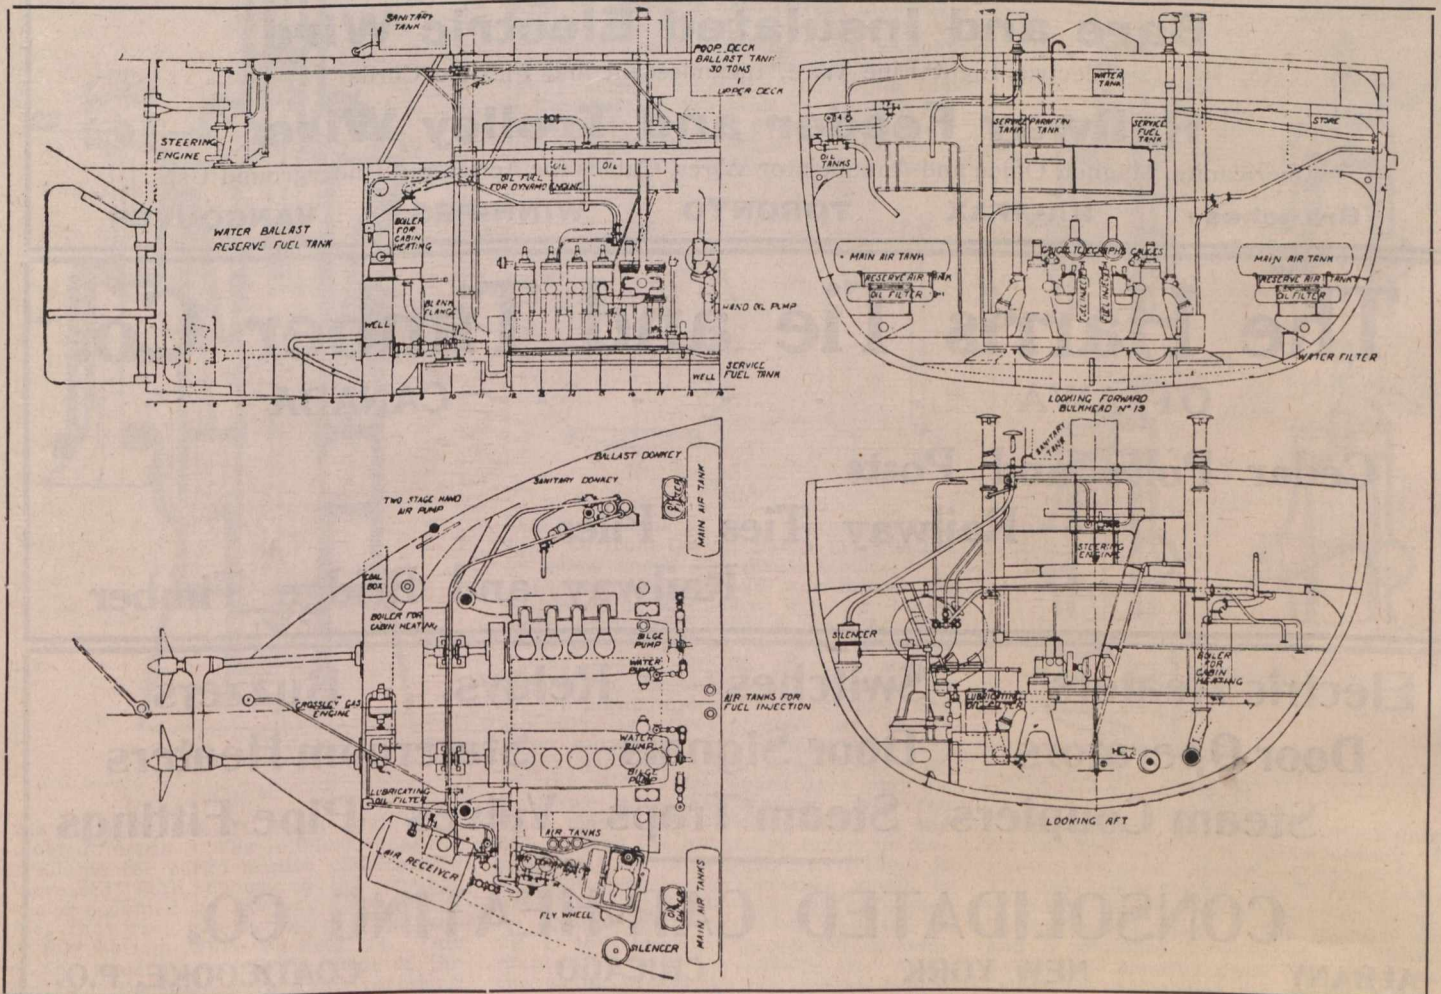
Arrangement of The Toiler's Propelling Machinery.
